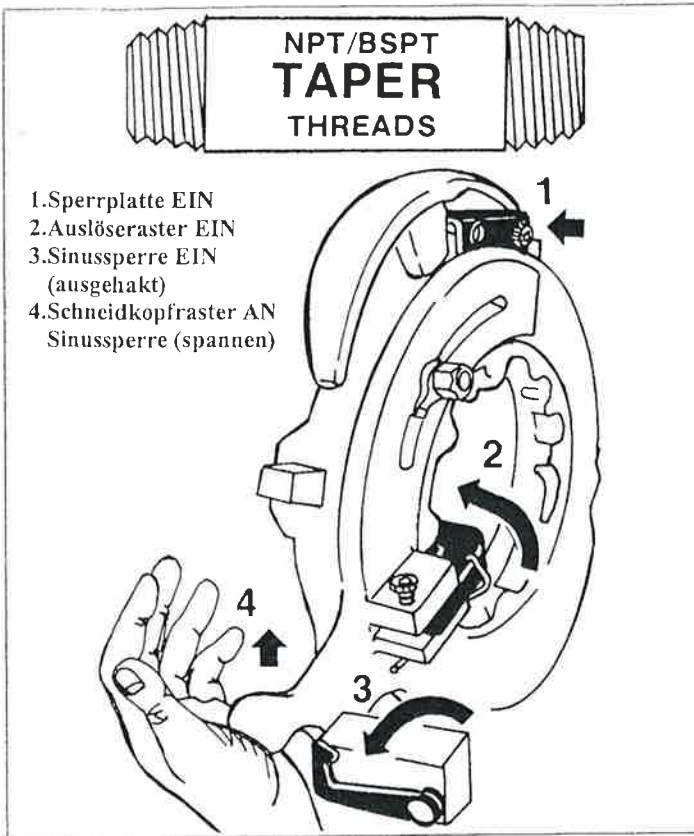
Setting No. 714 or 914 Self-Opening Die Head for NPT or BSPT Threads
